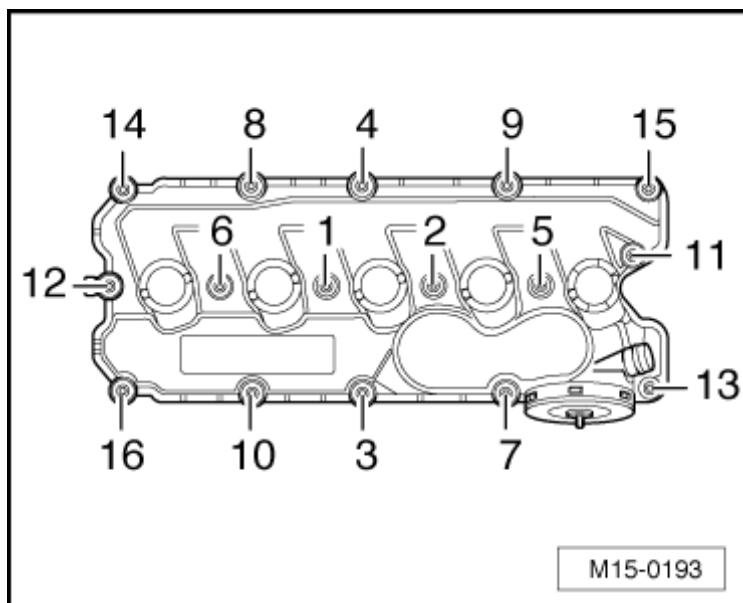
Removing Bolts For Cylinder Head Cover In Sequence
